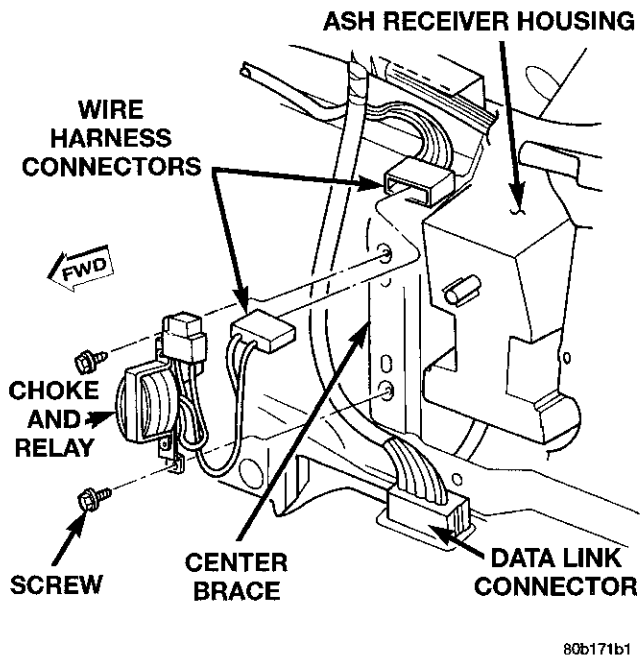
Filter, Choke, and Speaker Relay Remove/Install
